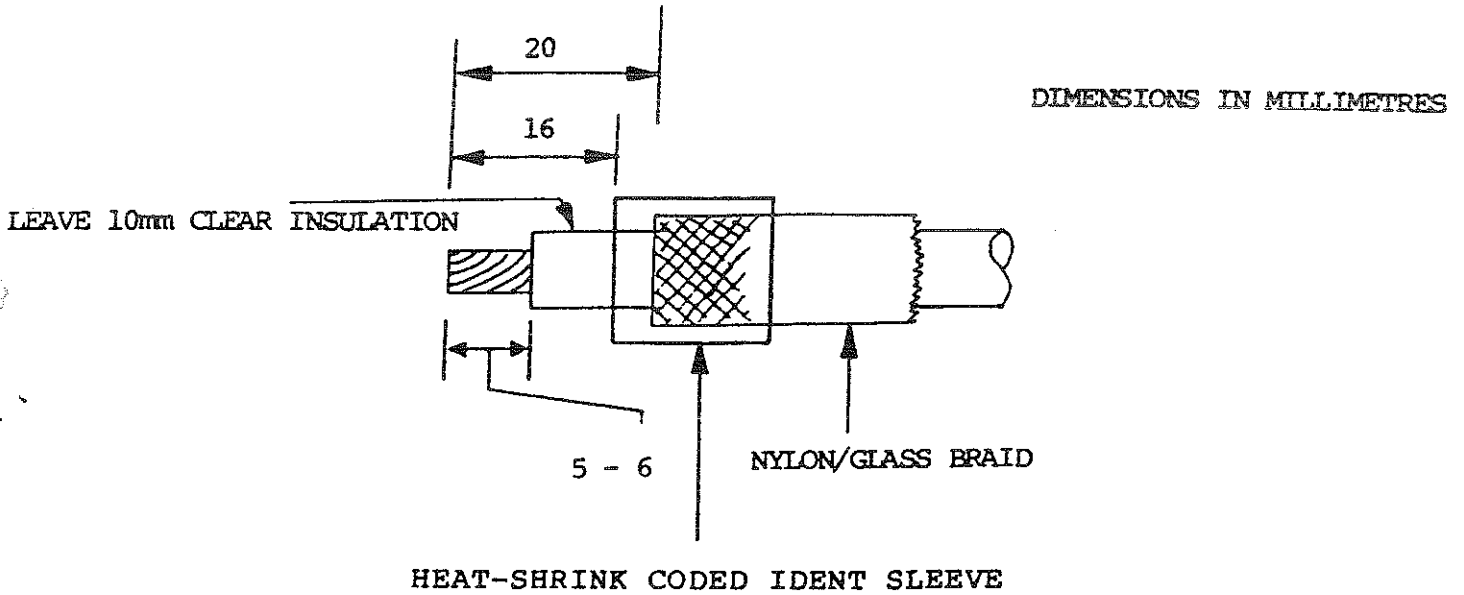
INDIVIDUAL WIRE STRIPPING DETAILS
